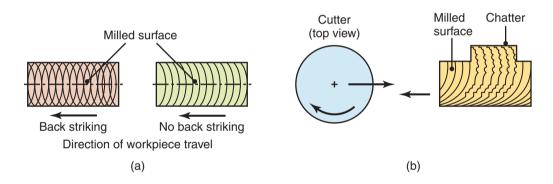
Machined surface features in face milling (see also Fig. 24.8).
